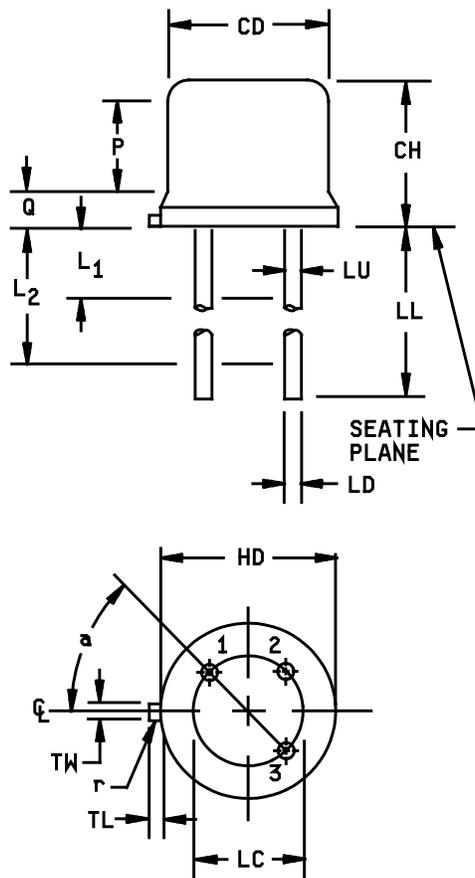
Physical dimensions, 2N5662 and 2N5663, (similar to TO-5).
